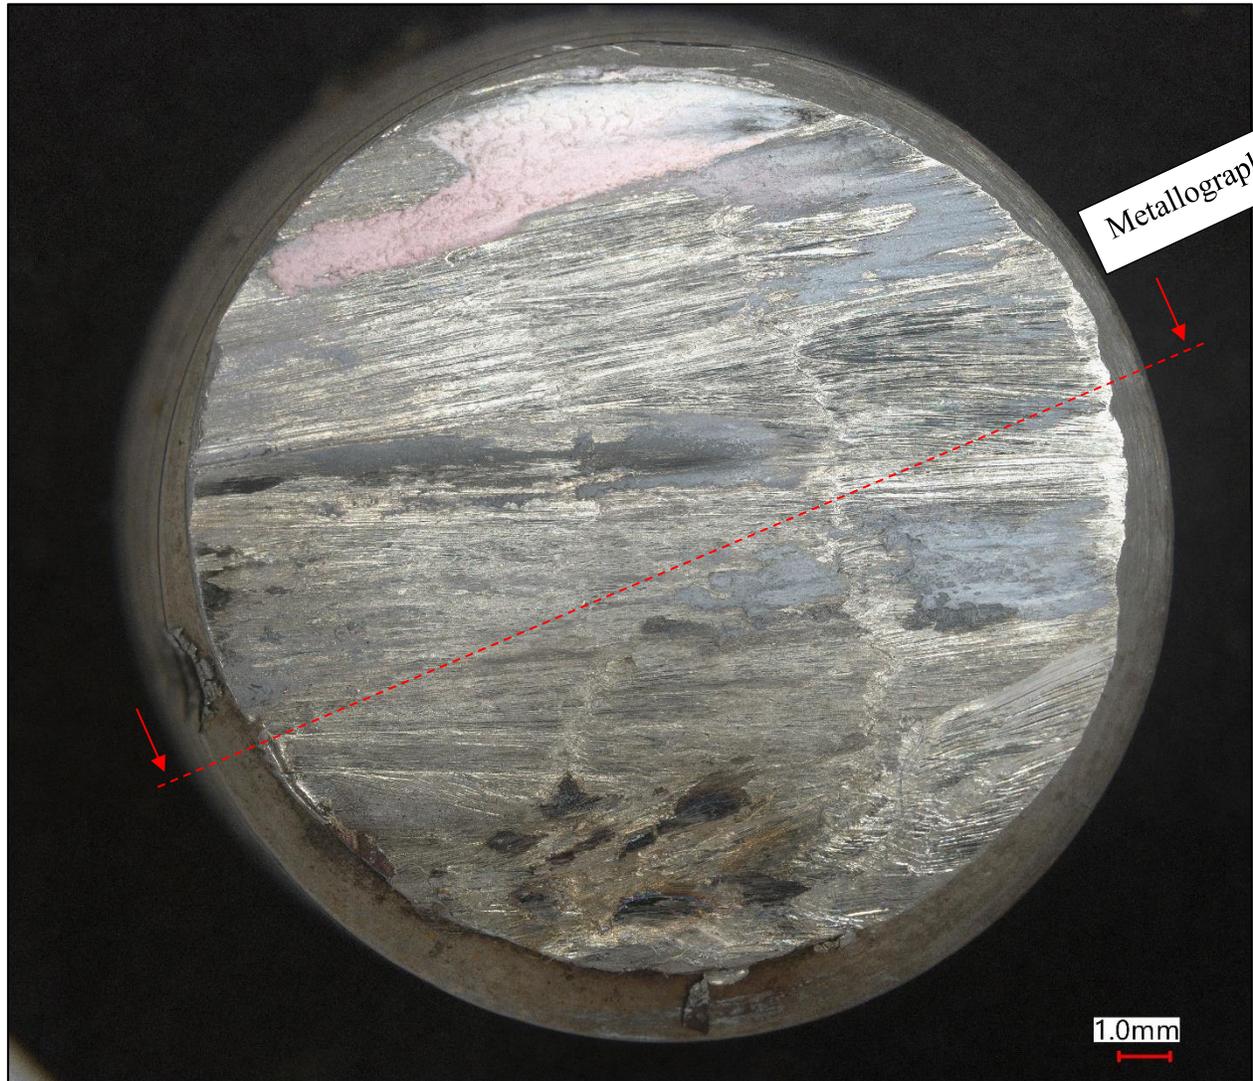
FRACTURE SURFACE, BOLT C5
